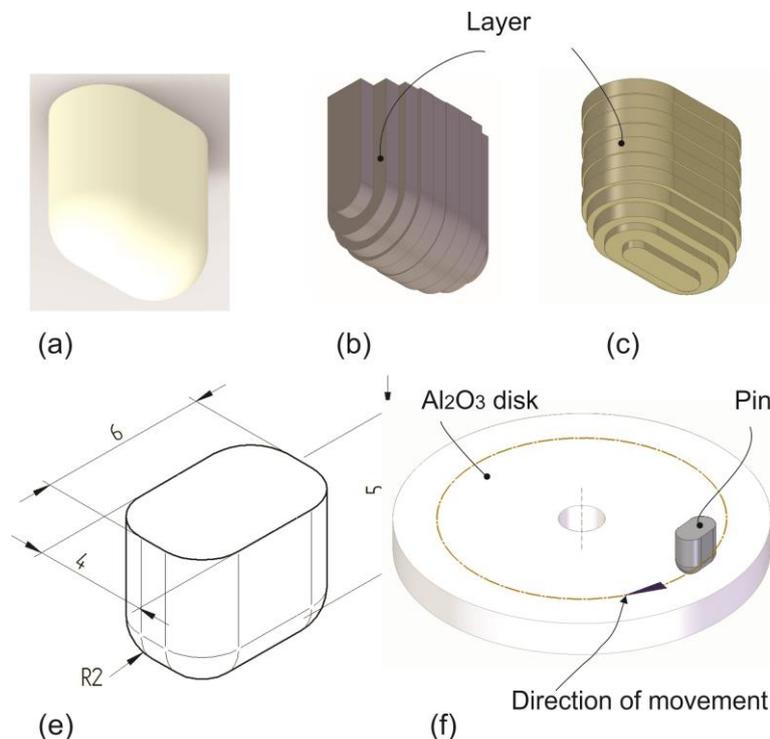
Schematic pins for wear test, and (a) pin model, in (b) pin with perpendicular layers, (c) pin with parallel layers, (d) dimensions of the pin and (e) direction of friction.
